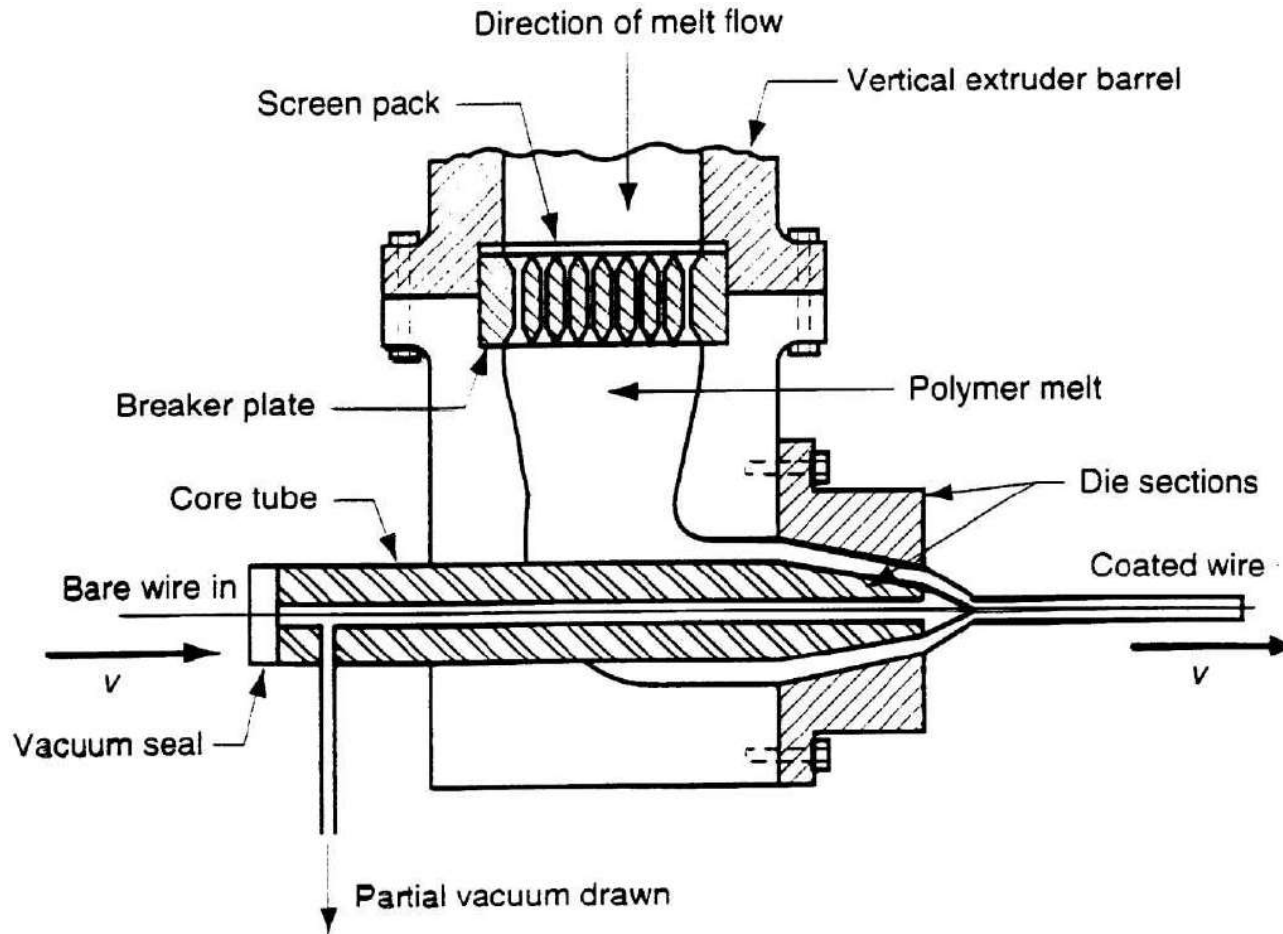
Side view cross section of die for coating of electrical wire by extrusion. (Some die construction details are simplified.)
